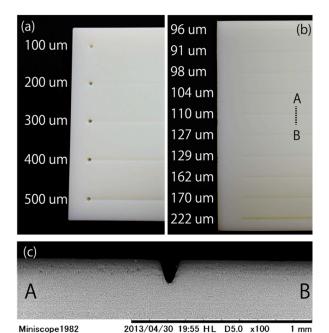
(a) 3D printed micro channels (b) Laser-carved micro channels on 3D printed plate (c) Cross-section of laser-carved micro channel
